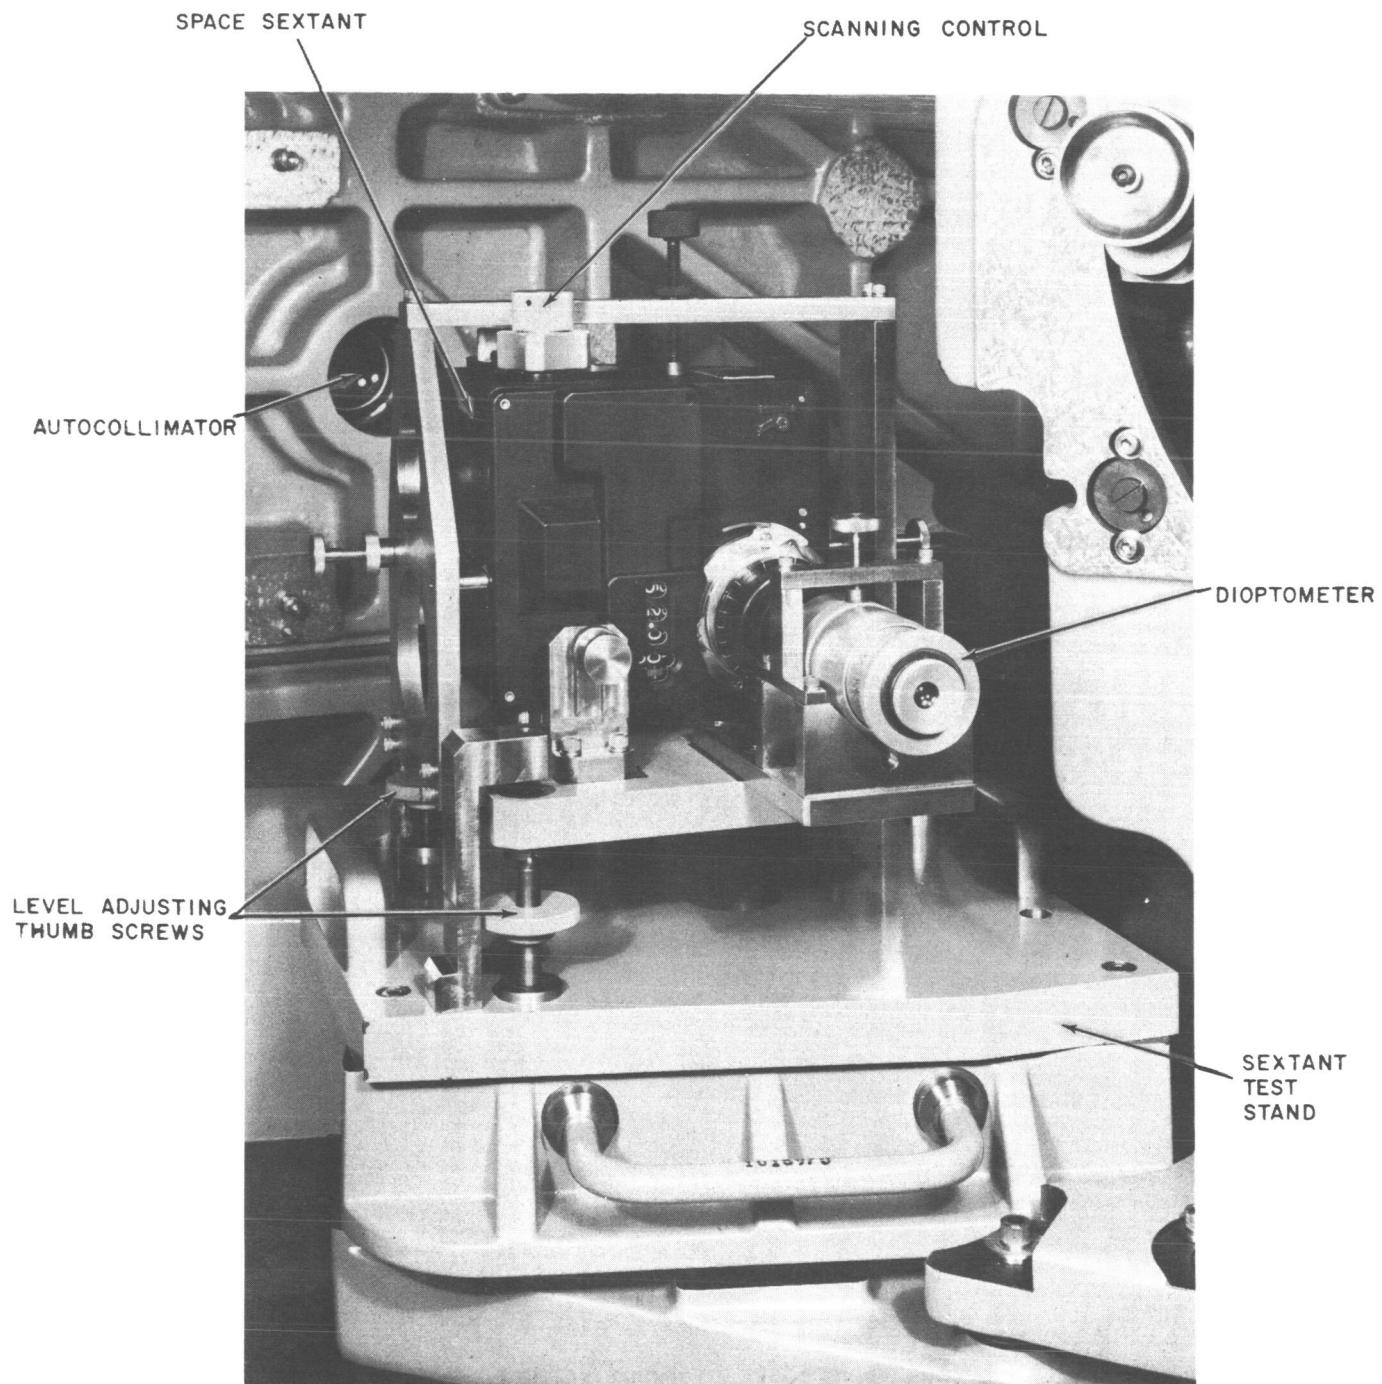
Sextant and Test Stand Mounted in Precision Test Fixture
